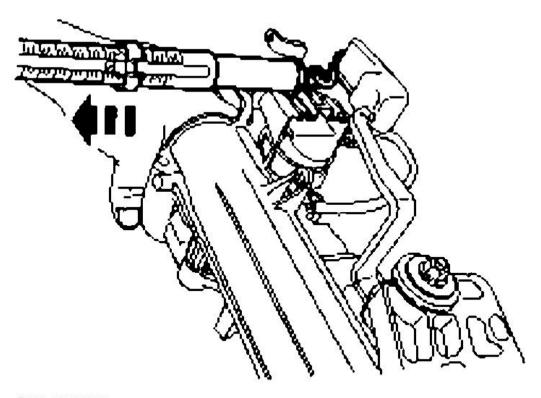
Identifying Tilt Lever Cam Courtesy of FORD MOTOR CO.
